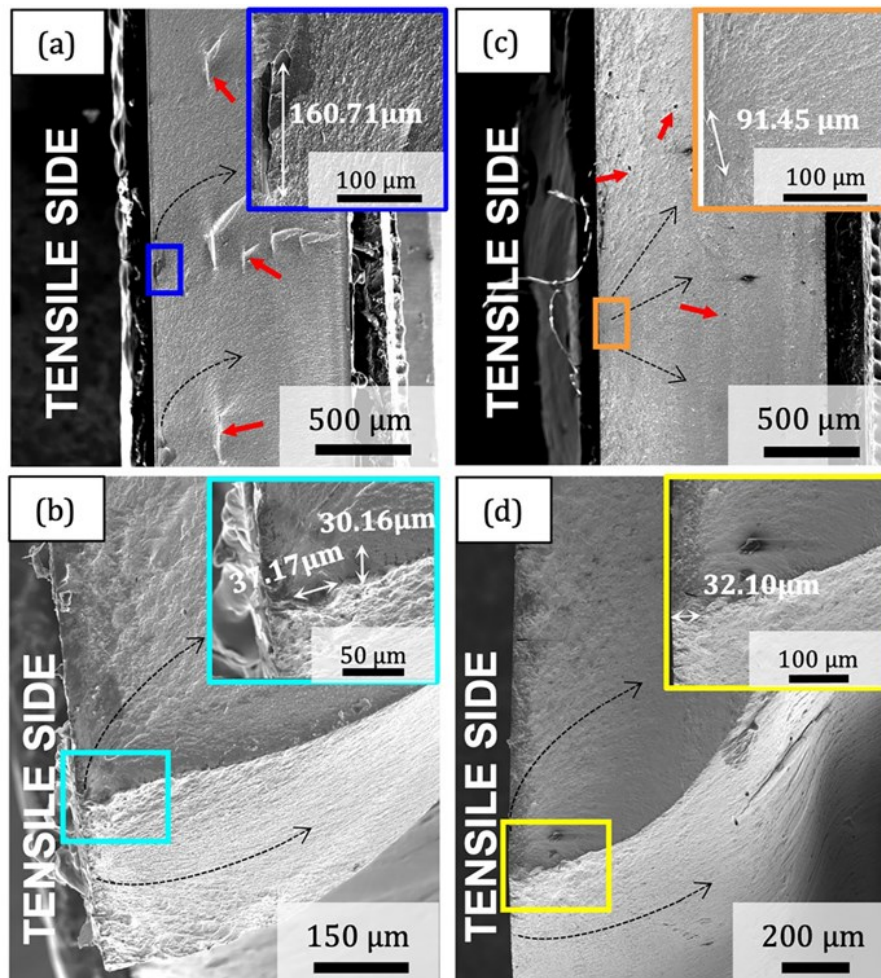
Secondary electron (SE) images of the biaxial fracture surface of 3Y-TZP discs manufactured by MEX using printing strategy 01 100 30 (a,b) and 02 110 30 (c,d). Indicative measurements of the critical flaw size.
